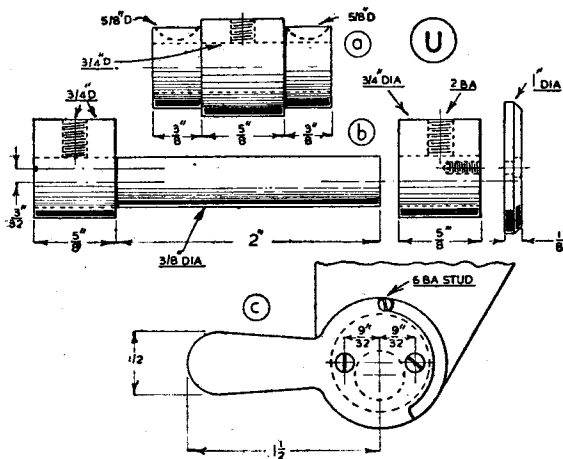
The layshaft assembly—U. The gear sleeve—a; the layshaft and eccentric mountings—b; the operating lever—c
